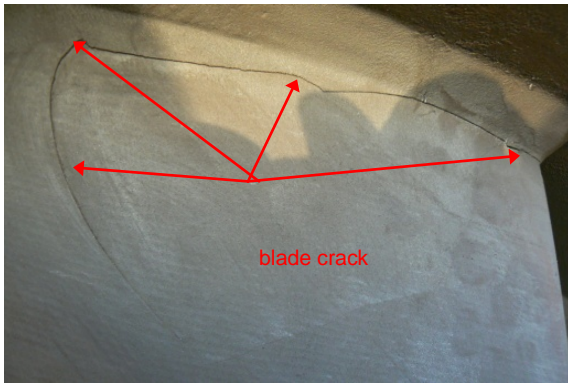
Third Impeller cracked blade leading edge – June 2007
